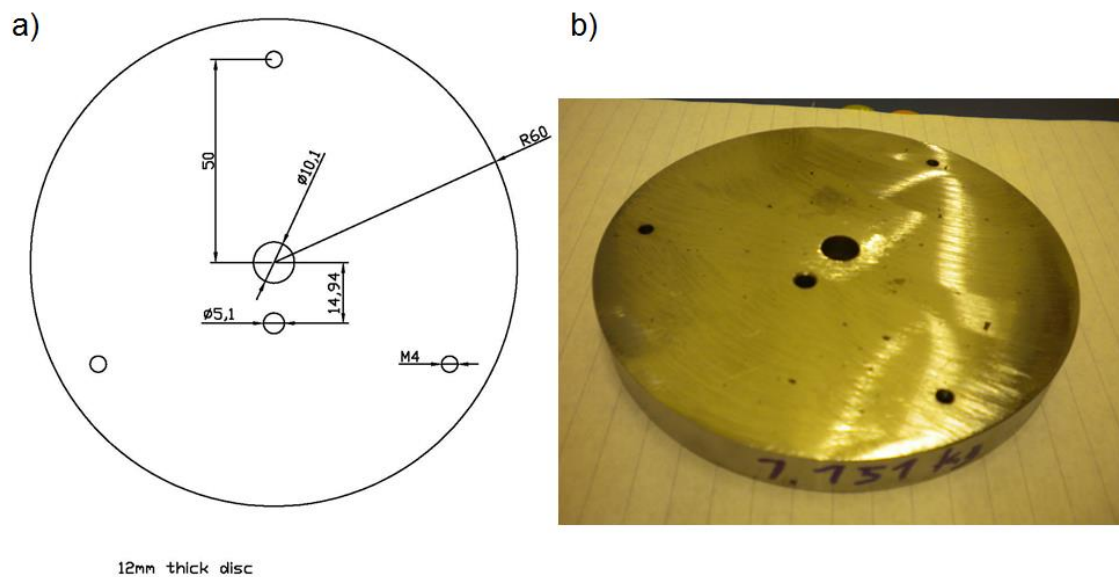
Disc for the Pin-on-Disc test; a) technical drawing of the disc (120 mm diameter; 12 mm thick; \varnothing 10.1 mm centering hole; \varnothing 5.1 mm drive hole; 3 x M4 grub screw levelling); b) specimen before welding
